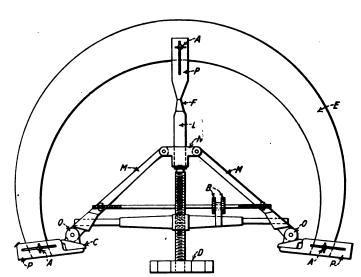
Caliper and Gage for Laying Out the Shoulder Pit on the Driving Box Brasses
